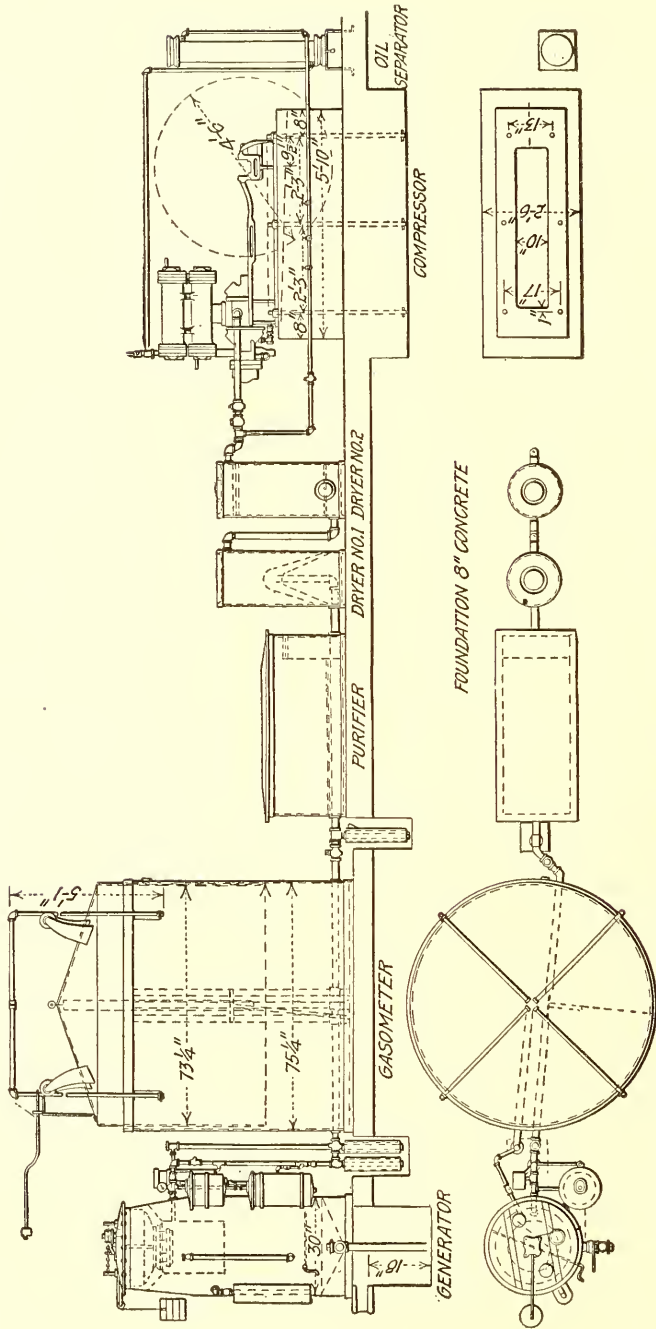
Navy Type Acetylene Plant Layout Length Over-all 36 ft. 6 in.
